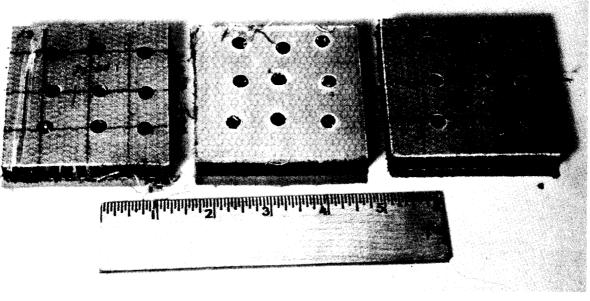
DRILL: .250 SPADE DRILL
